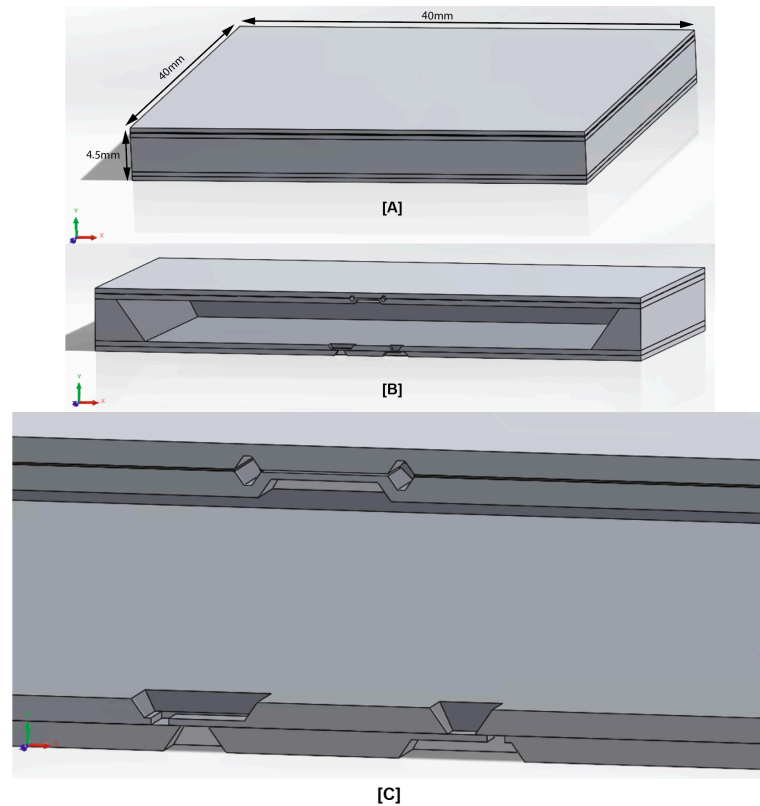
Three-dimensional model of the final Micropump design in SolidWorks: [A] Isometric view of Complete Chip Design and dimensions, [B] Sectional view of the full assembly, [C] Closer sectional view to observe the micromachined components within the design model.
